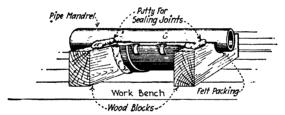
Method of setting up a small split bearing before pouring the babbitt.
